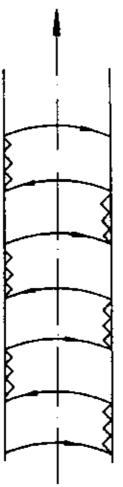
Electrode manipulation for welding the inner passes and the cover pass
